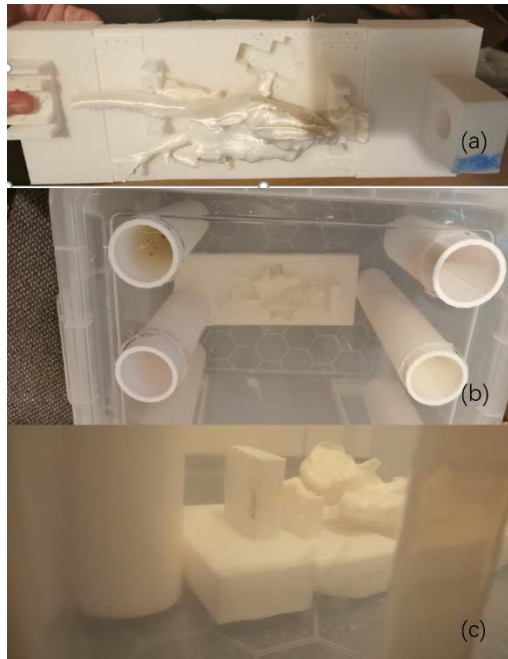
Upgraded mould assembly with Layfomm40 atrium model inside a water-filled container: (a) top view of atrium model and mould base assembly; (b) top view of container with patch holders; (c) side view of mould assembly when filled with water
